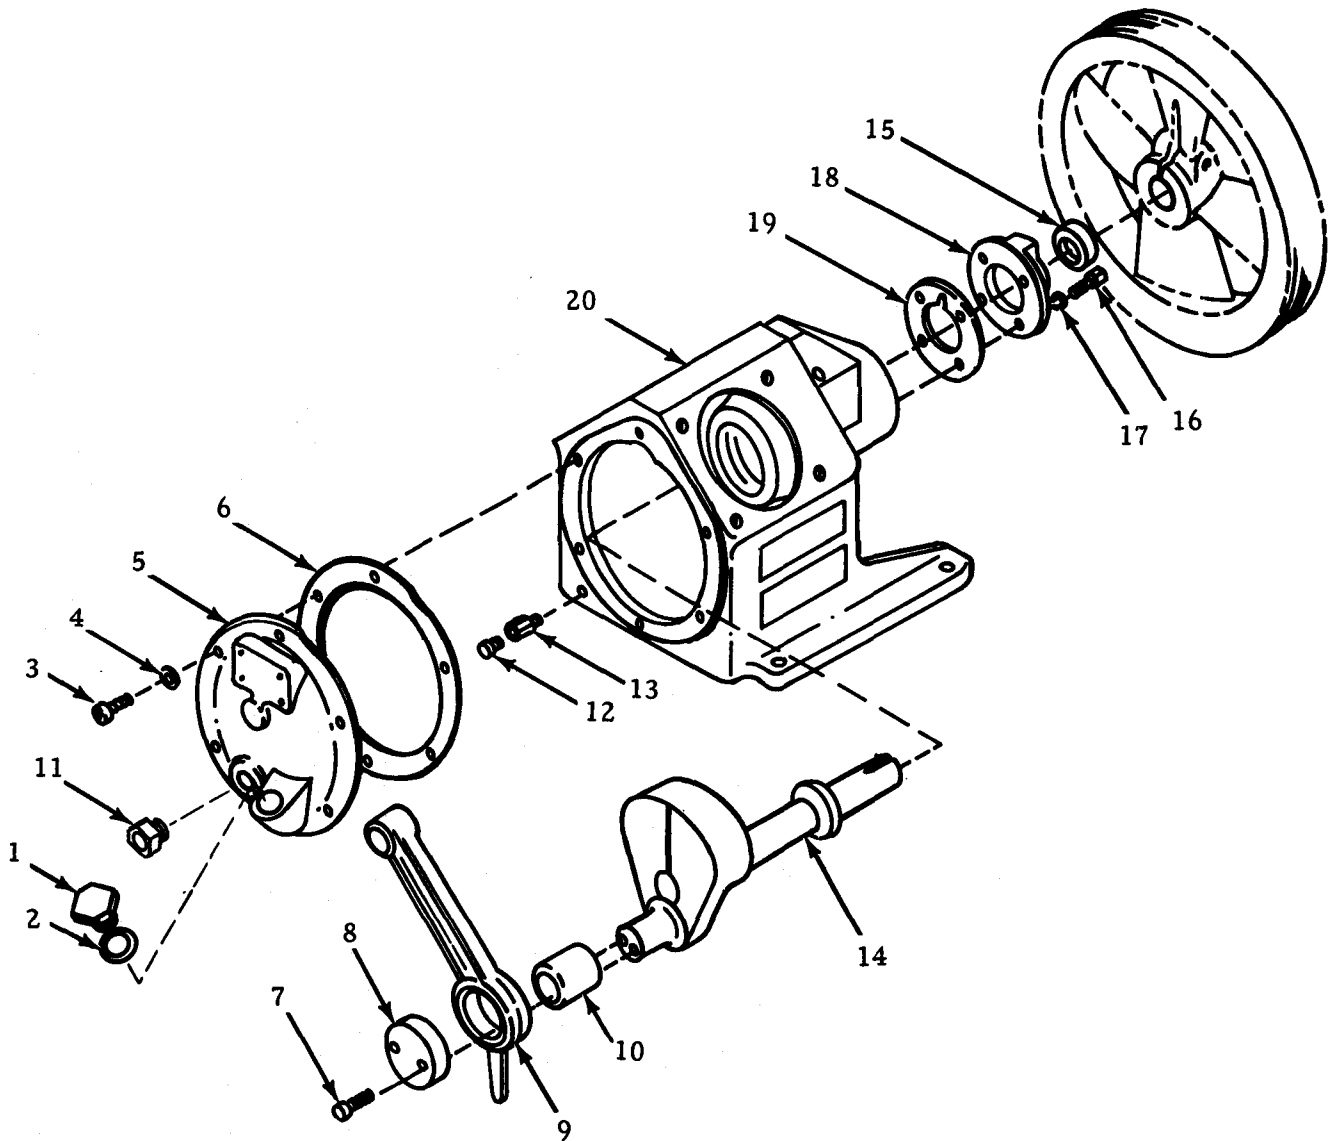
Crankcase, Connecting Rod, Oil Seals, Bushing and Crankcase
